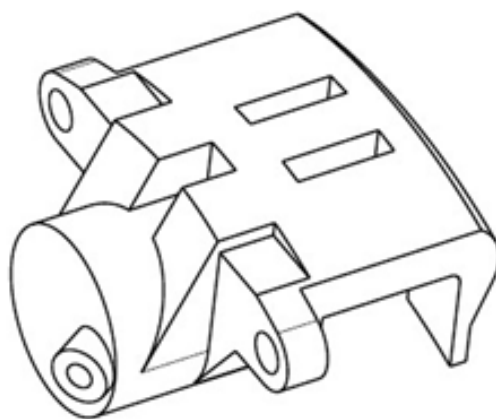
DETAILED DRAWING OF FLOATING BRAKE CALLIPER DESIGNS
